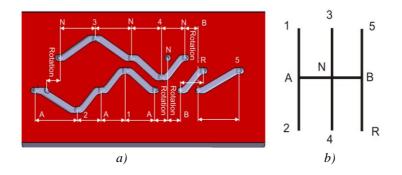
a) Profile plate with gears displacement: 1...5 - number of a gear, N-neutral, A, B - neutral positions of a gearbox between two specific gears, b) H scheme of gearbox gear shifting process
